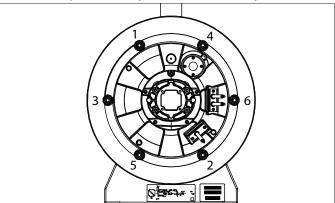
400 - 1000 Model Heat Exchanger Detail - Burner Door Torque Sequence
